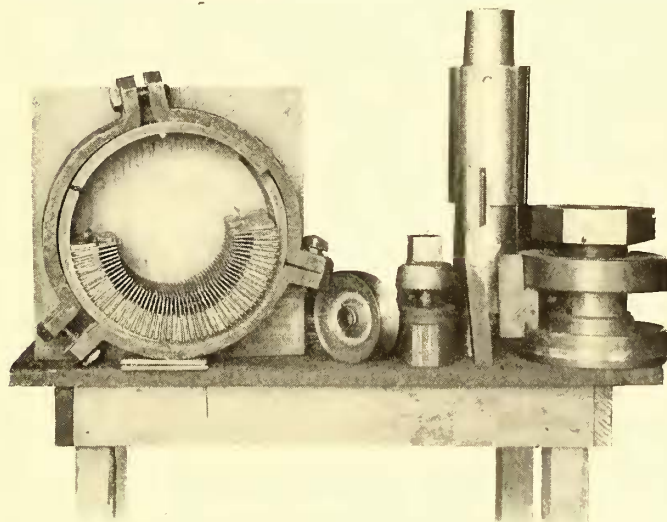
CLAMP AND COMMUTATOR SEGMENTS, ARBOR FOR TROLLEY WHEEL, TOOL FOR TURNING TROLLEY WHEEL, EXPANDING MANDREL AND COMMUTATOR CORE
